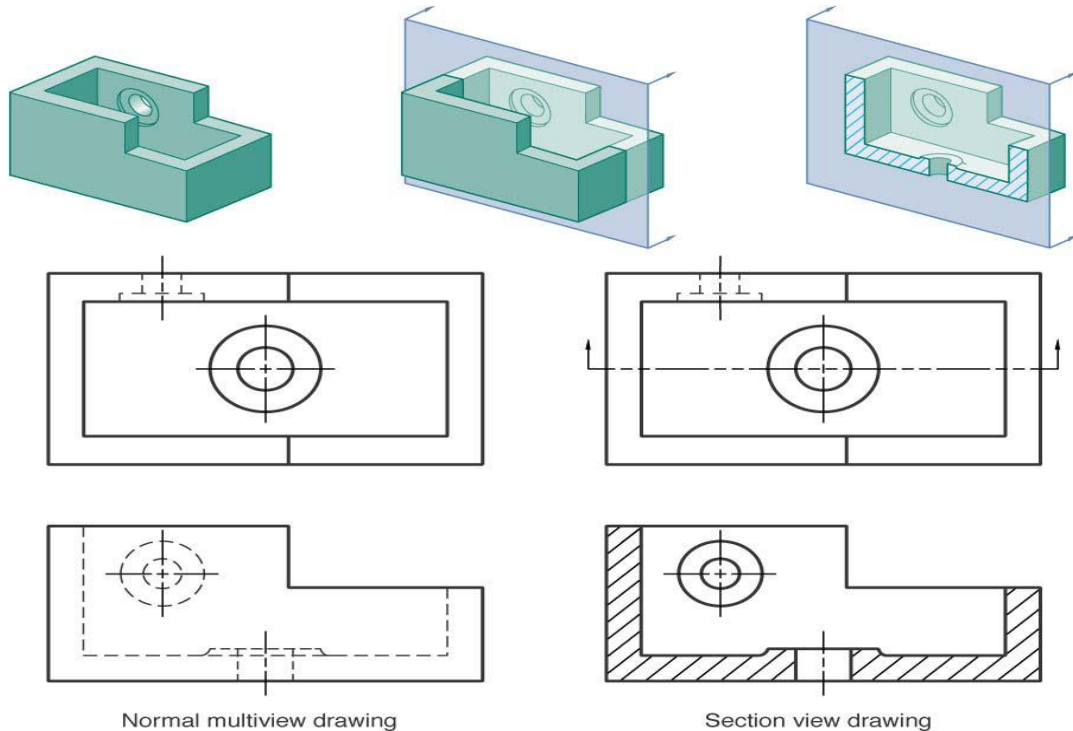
Figure shows a regular multi view drawing and a sectioned multiview drawing of the same part the front view; the hidden features can be seen after sectioning.
